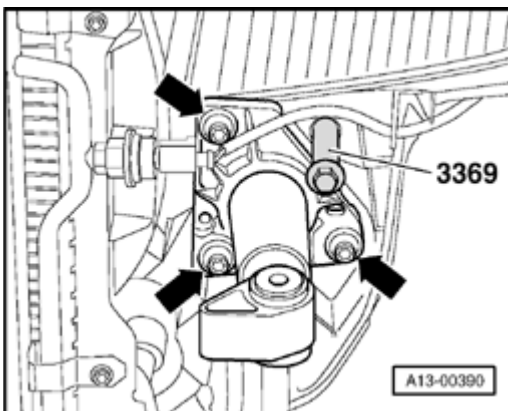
Screwing Special Tool 3369 Into Free Holes On Left/Right
